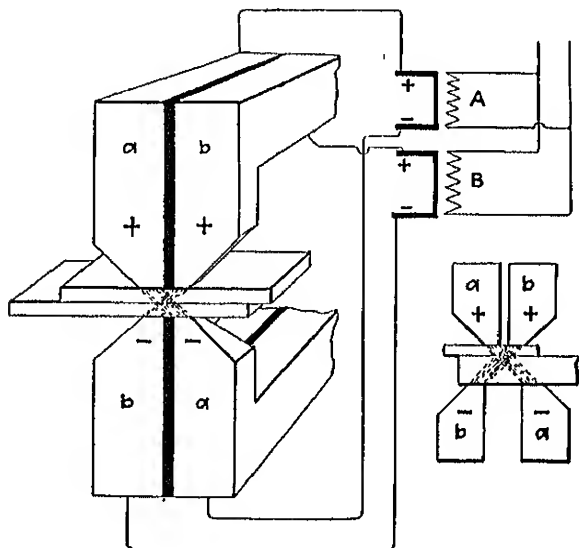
The Taylor Cross-Current Spot Welding Method.
